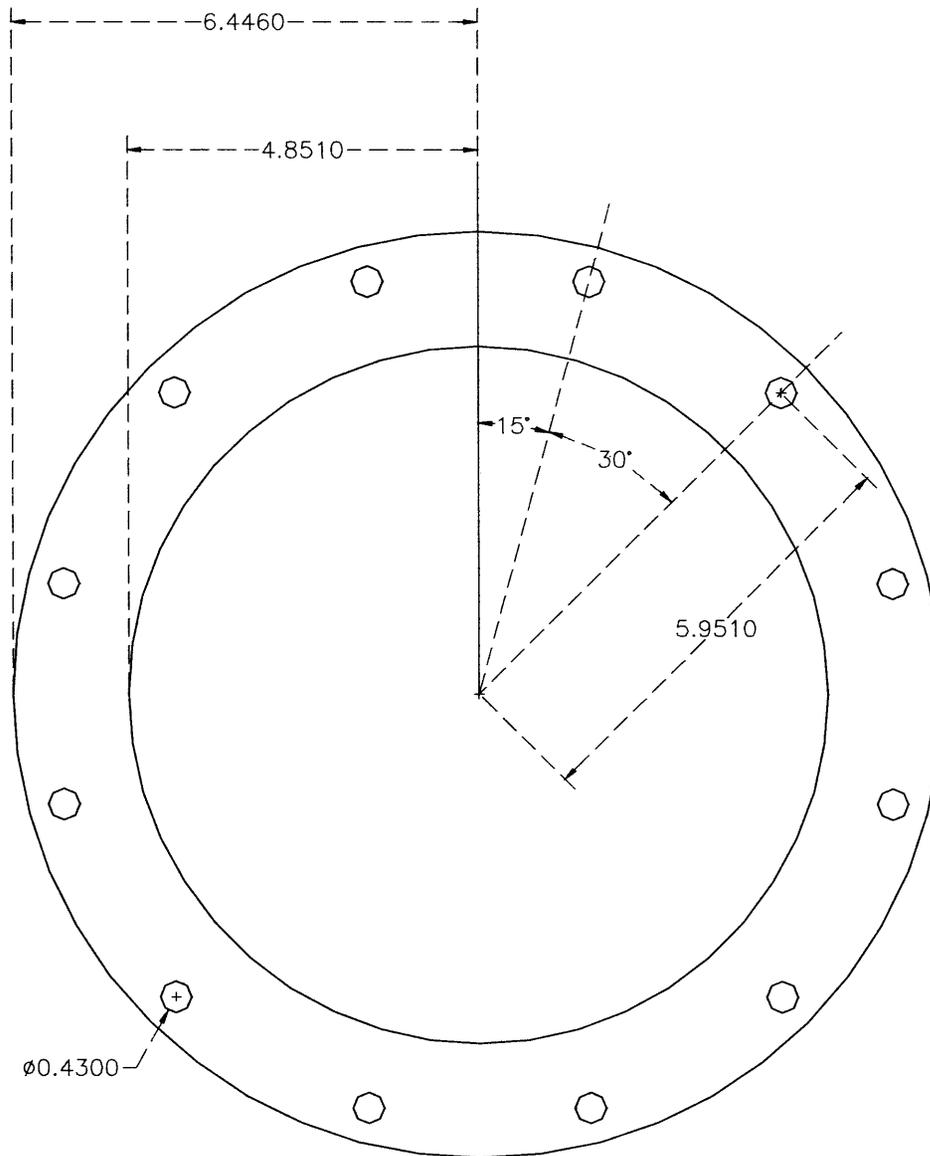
Detail of bottom flange (mates to wafer chuck flange)
